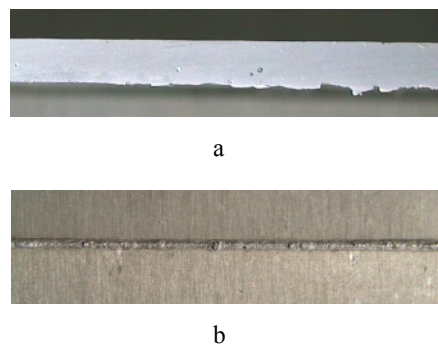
Porosity (a) and inverse form (b) of weld by welding process two
